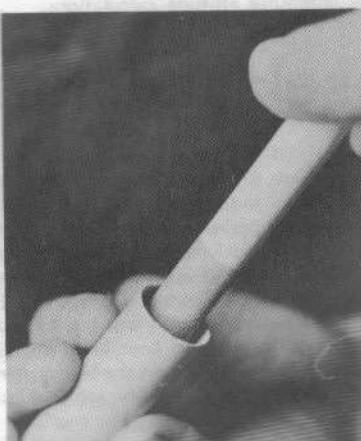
Clean up the inside a little with some fine sandpaper glued around a piece of narrower body tube.
